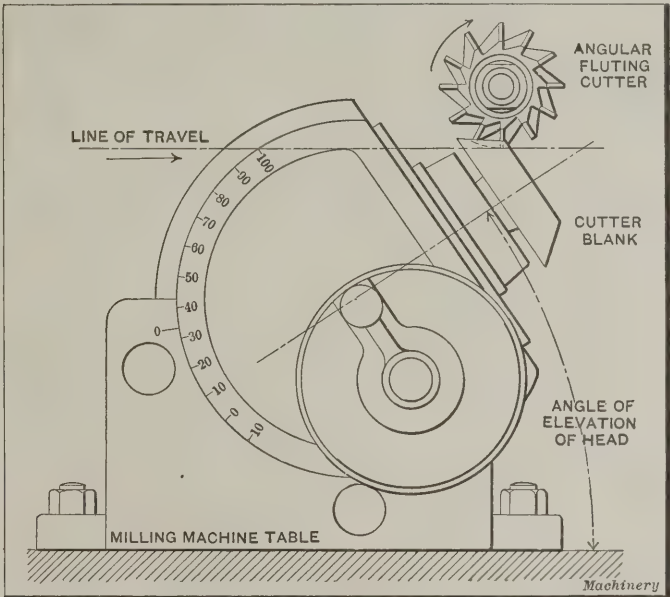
Dividing Head set for Milling Teeth in Angular Cutter
